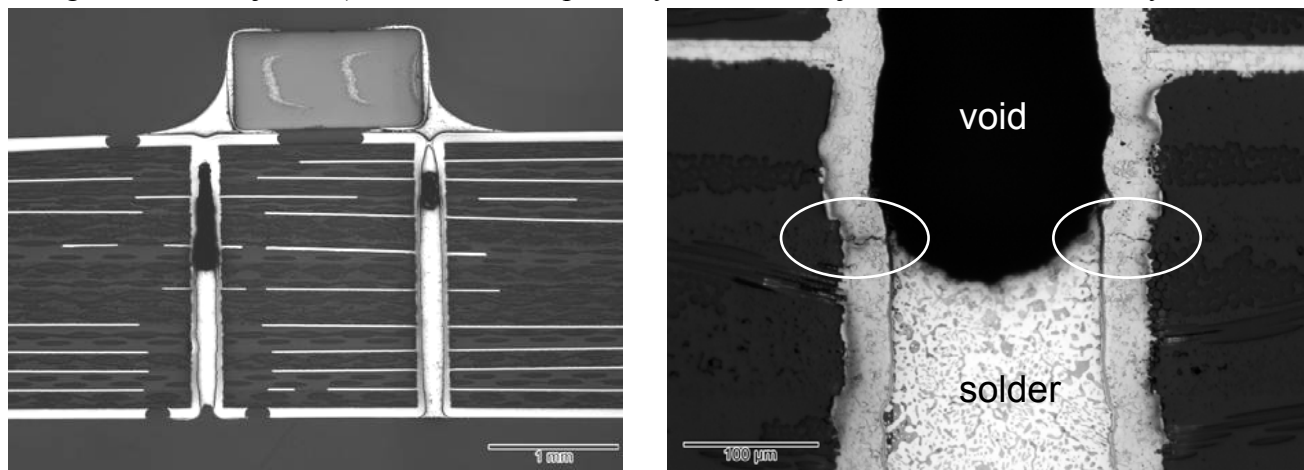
a) Low magnification optical micrograph of a surface mount device with underlying solder-filled vias (no pins). b) Via cracks in a partially filled solder joint after 100 thermal cycles.
